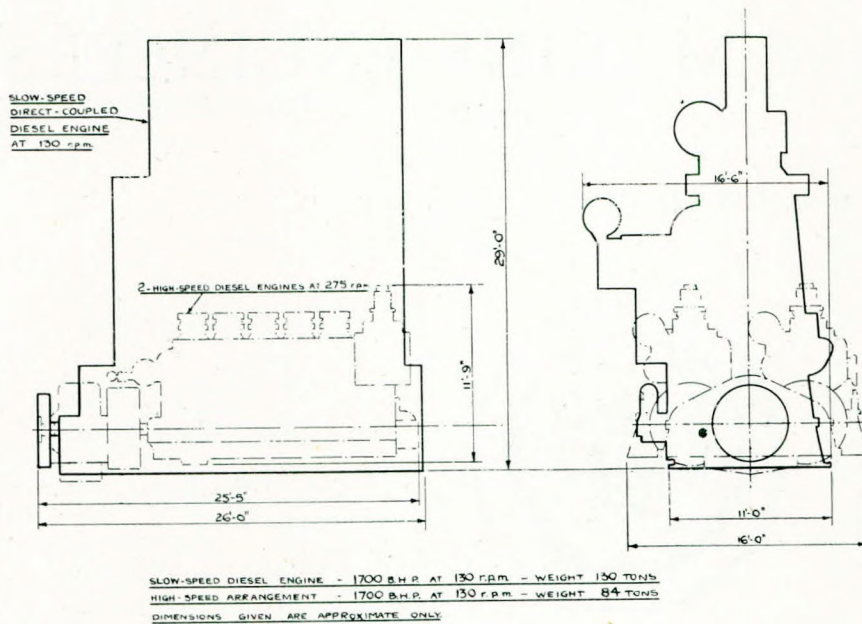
Comparison of slow-speed diesel engine and high-speed engines with geared drive.
